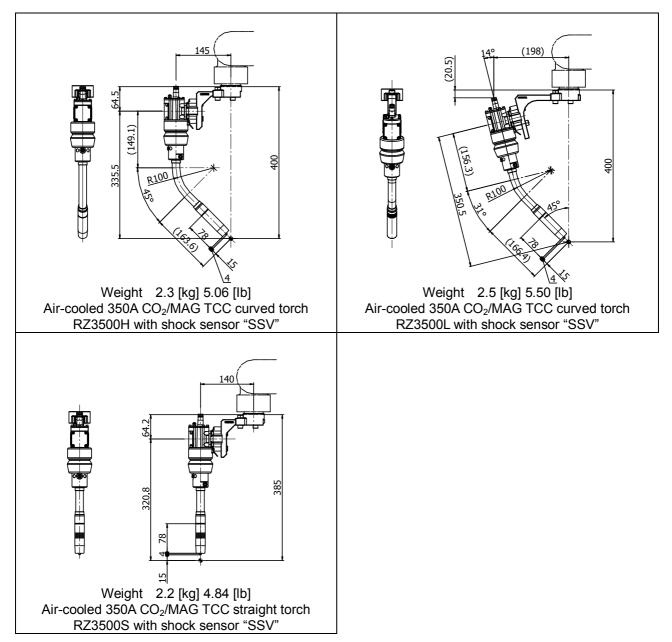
Outline drawing of Air-cooled 350A TCC torch (High rated duty cycle type) (for V type, A type) Unit (mm)
